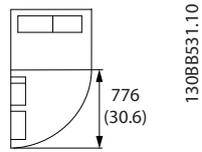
Front Clearance of IP21/IP54 Enclosure Type, Frame Size F8
